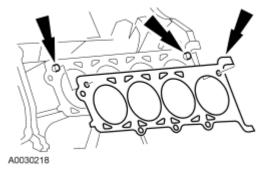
Head Gasket & Dowel Pins Courtesy of FORD MOTOR CO.
